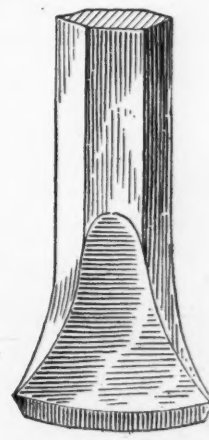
THE OLD WAY OF SHAPING A DRILL
